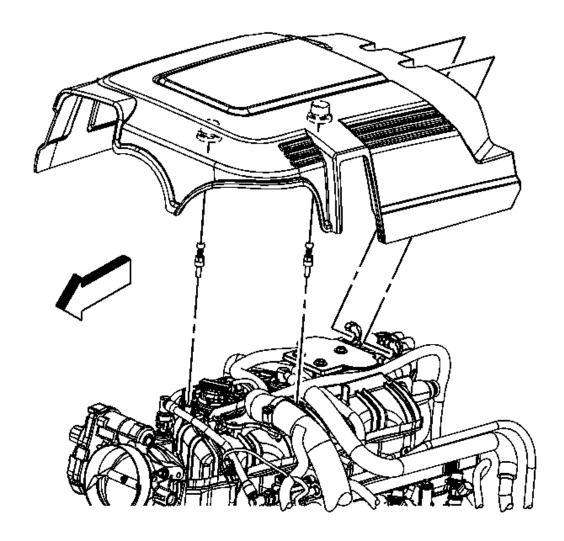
View Of Upper Intake Manifold Sight Shield Courtesy of GENERAL MOTORS CORP.
